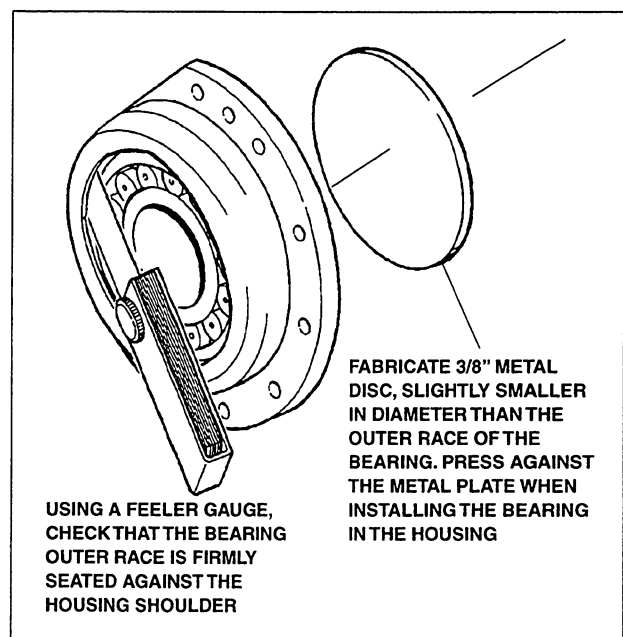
Installing Shaft Bearings into Bearing Housing
